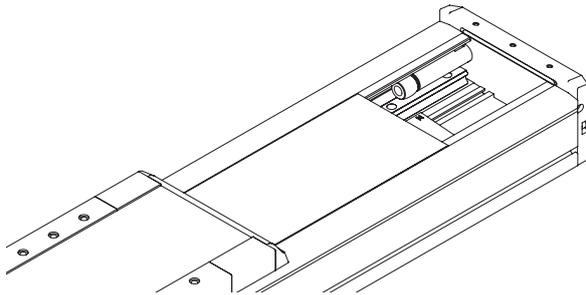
Mounting the cover strip under the cover strip clamp
